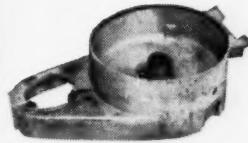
Original Construction—Base for processing machine. Weighed 67 pounds. Material Cost—\$15.05; Machining Cost—\$7.34. Total Cost \$22.39.
